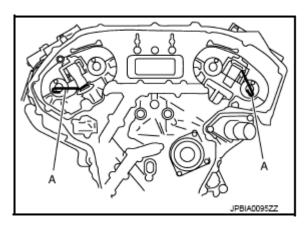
Identifying Stopper Pin Courtesy of NISSAN NORTH AMERICA, INC.
